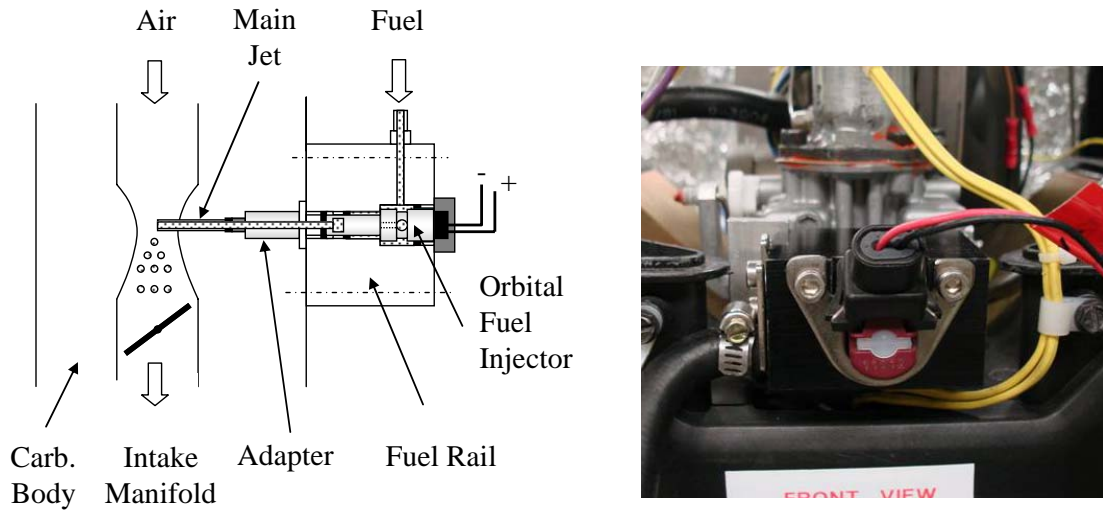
Carburetor-mounted fuel injector. Schematic (left), picture (right)
